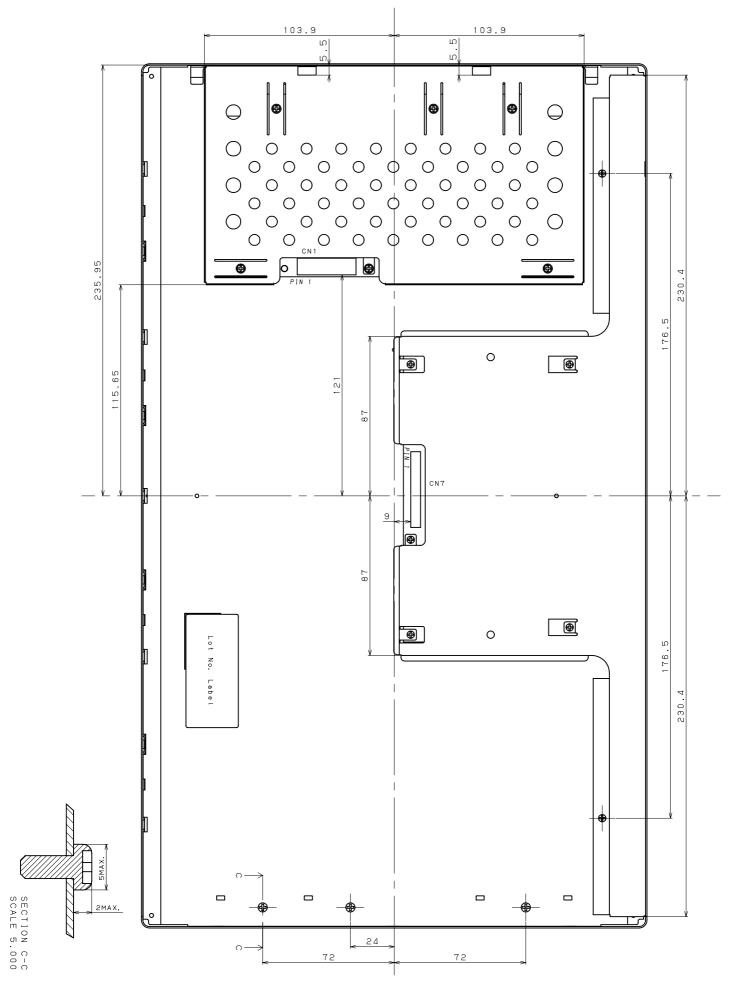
OUTLINE DIMENSIONS (REAR SIDE)
